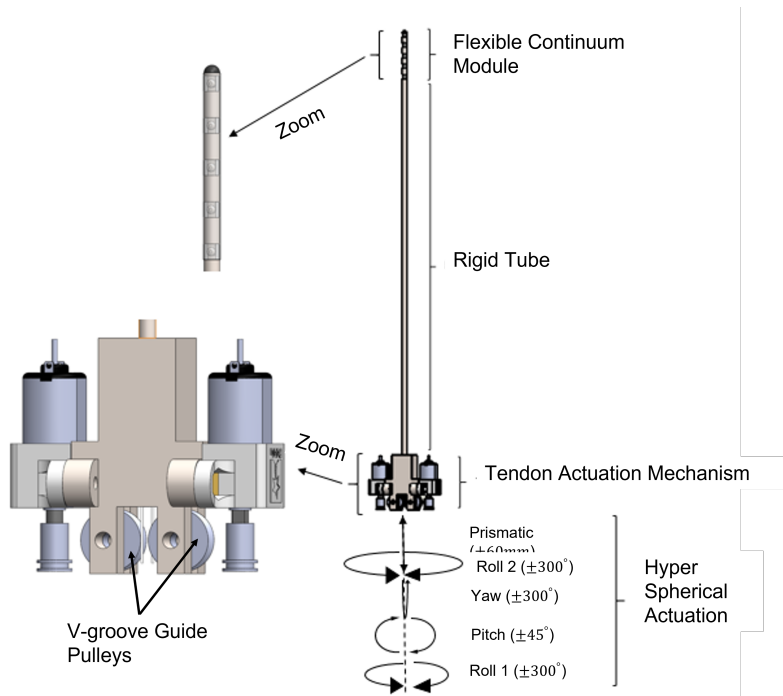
Original Proposed Robot CAD Assembly (Masters Thesis) [5]
